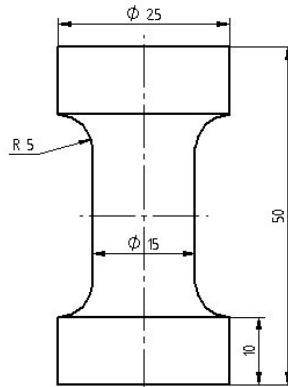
Dumbbell testing specimen for the uniaxial measurements.
